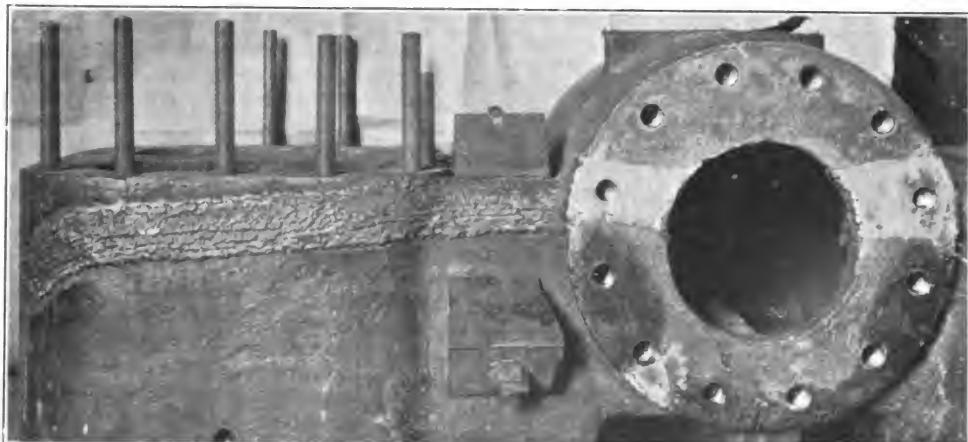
Final appearance of the welded pump, indicating the removal of the welded metal from the head where the valve seats
